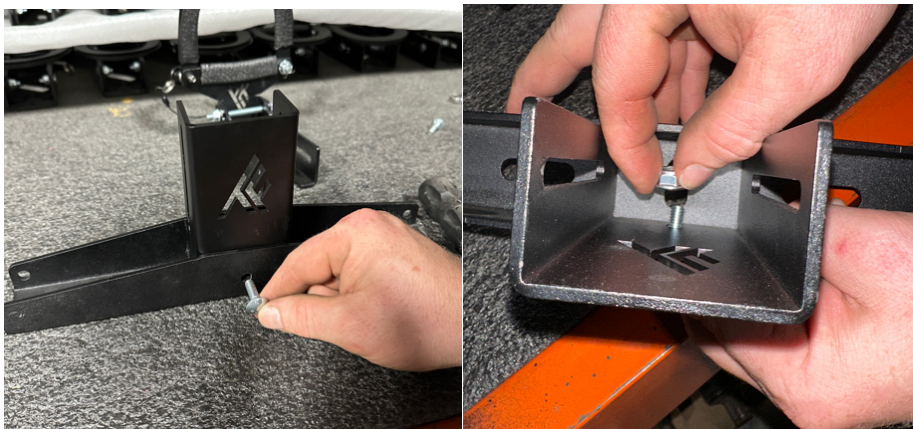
& FIG 2 - Fasten Bed Rail Attachment Plate to Foot Bracket using a 7/16" Wrench
